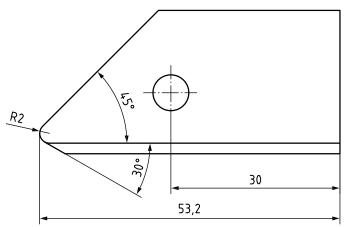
Front plate (Ref. No. 1 in Figure 1) of upper clamp
